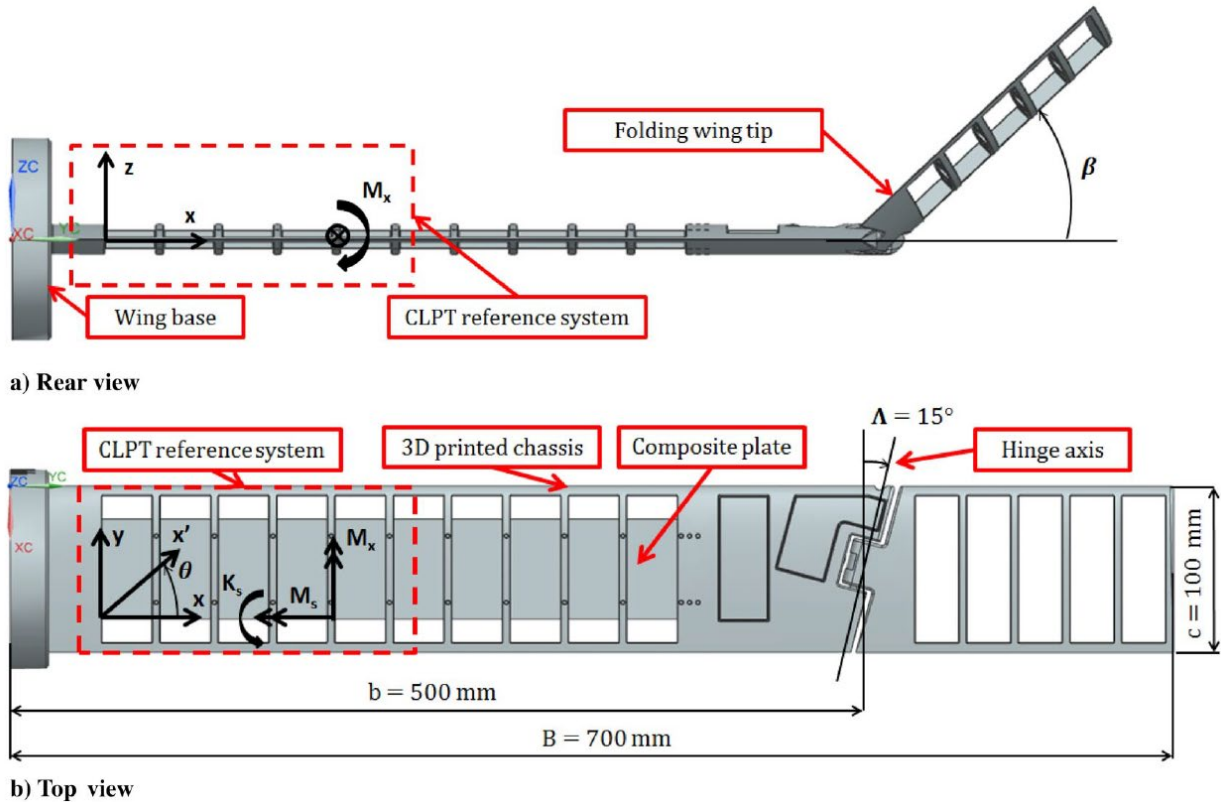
CAD model of the wing with indication of dimensions, from the wing design study in Ref. [10].
